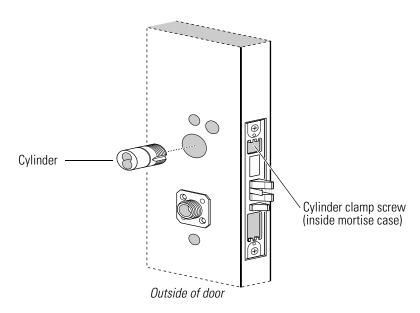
Removing and reinstalling the B.A.S.I.S. cylinder
